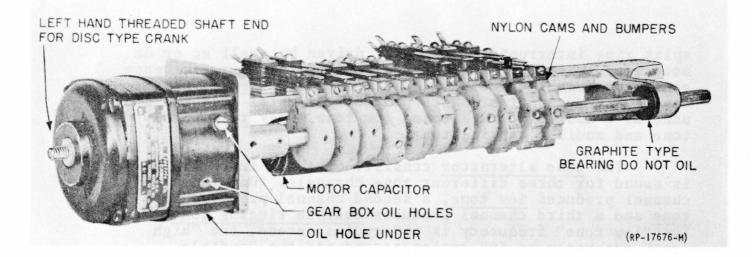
AC Motor Driven Low-Speed Interrupter
